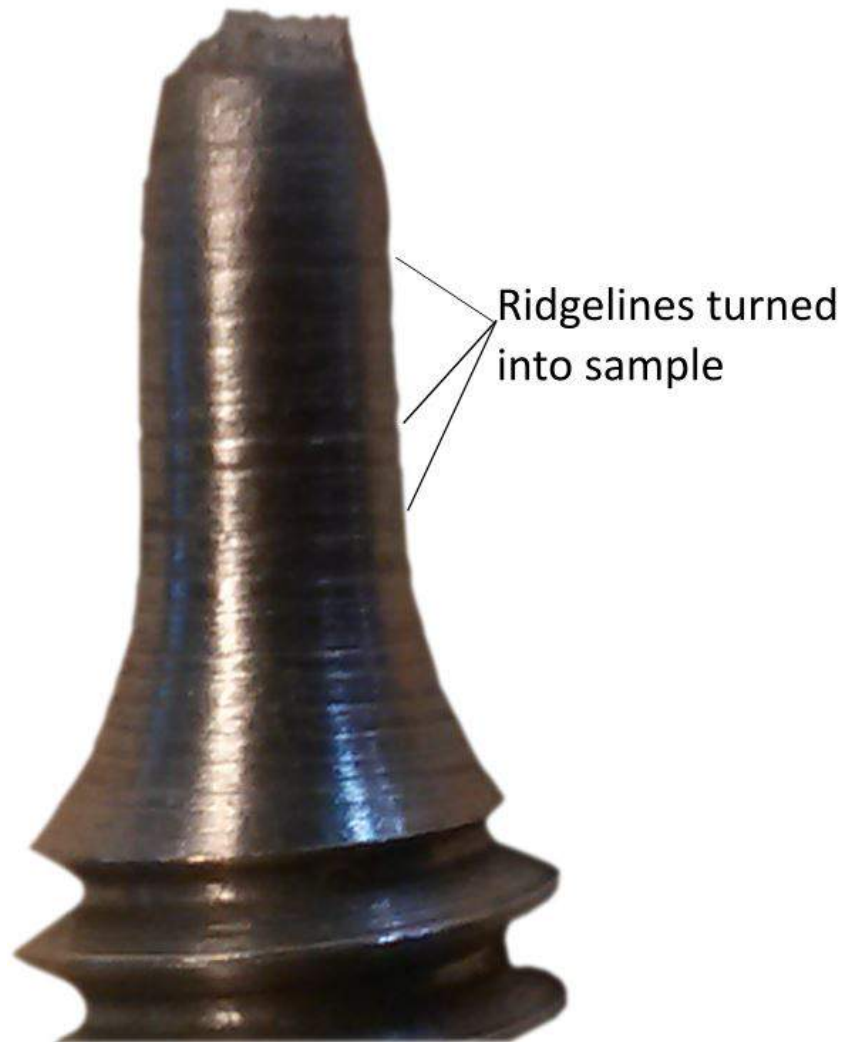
Sub-size ASTM E8 threaded dogbone specimens. Rough machining visible in jitter marks on the threads of the specimen and the turning marks on the gage length. Photo credit to Ron Hoffman.
